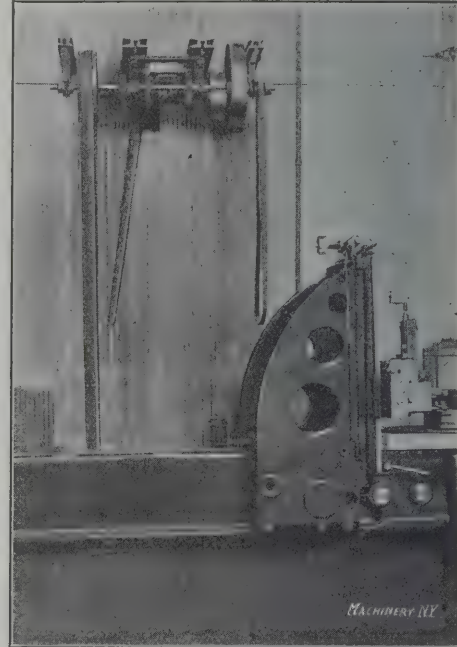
Planer equipped with a Lodge & Shipley Variable-speed Lathe Countershaft
